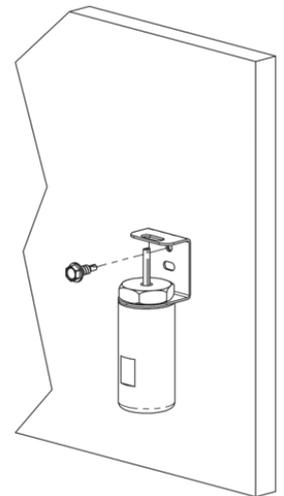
Hanging Bracket Wall Installation (Customer Provided Screws)
